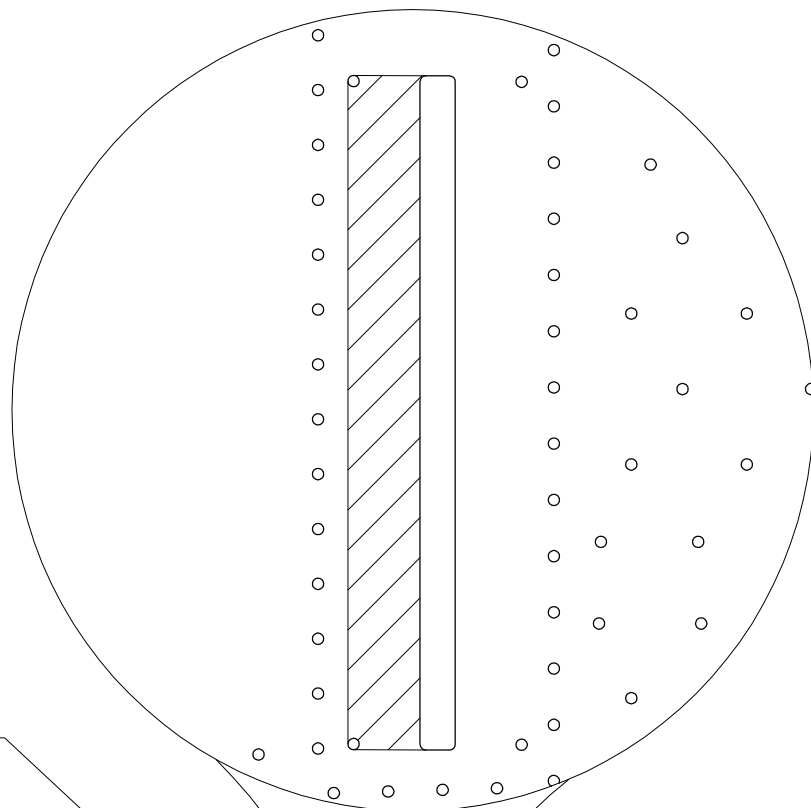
MAKING THE LEFT SKIN SPAR CUTOUT
